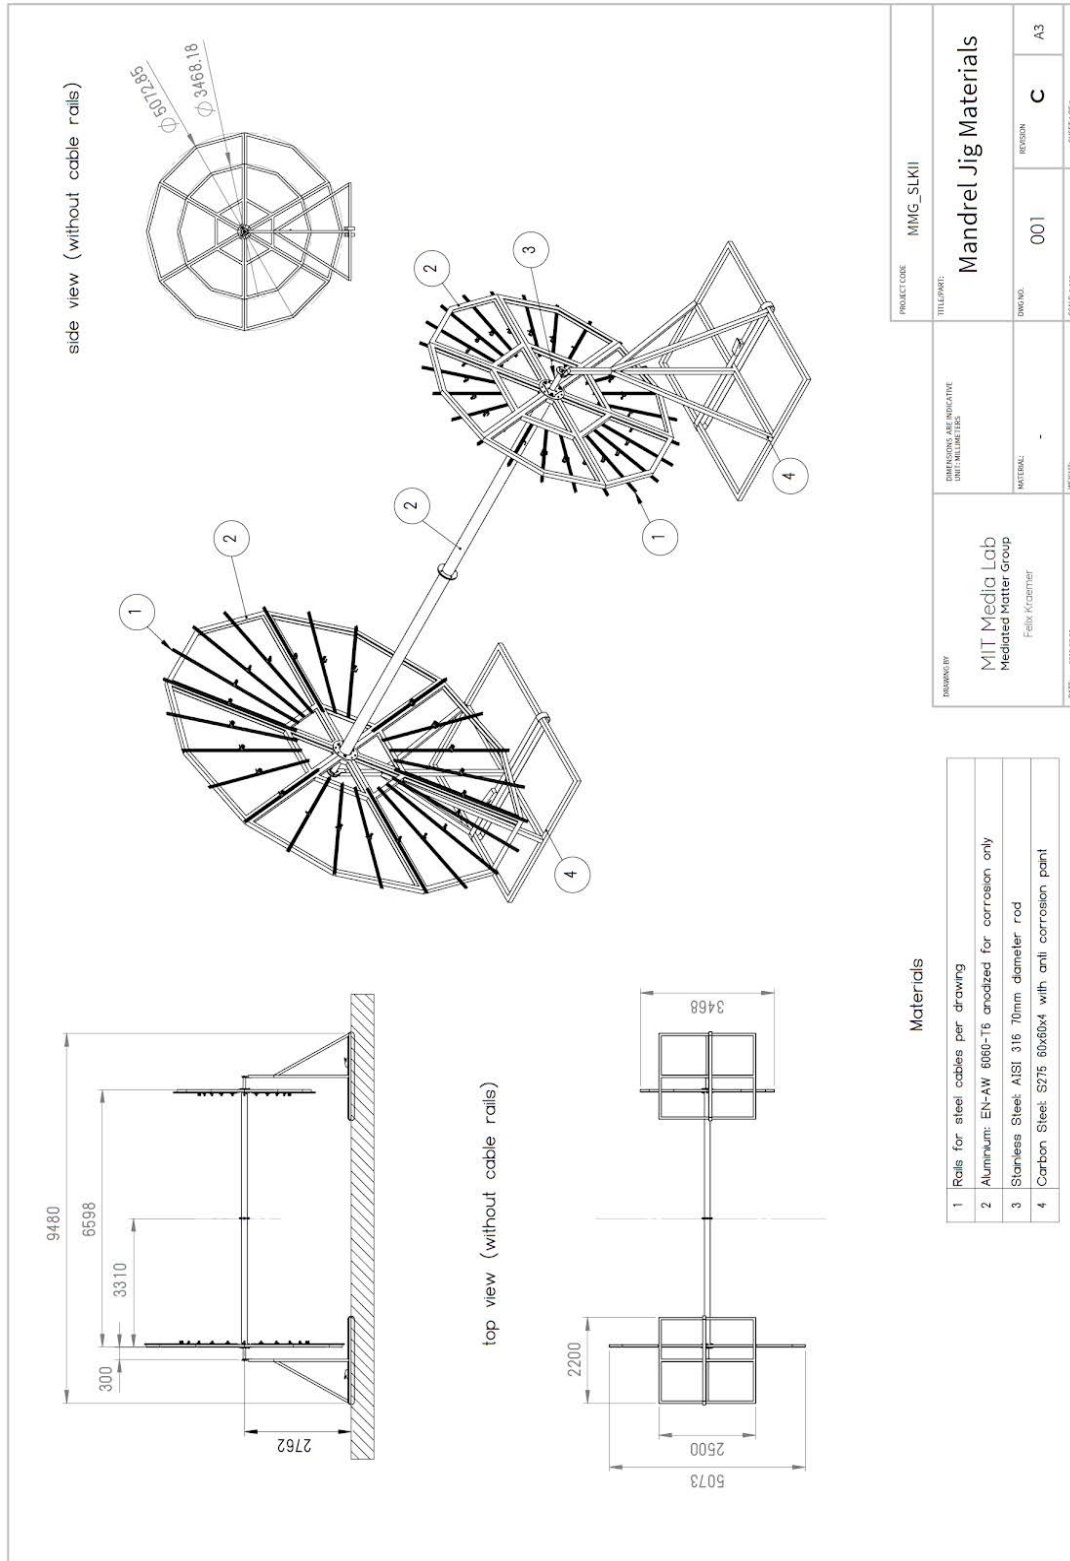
(a) Overview CAD Drawing of Platform: Overview
